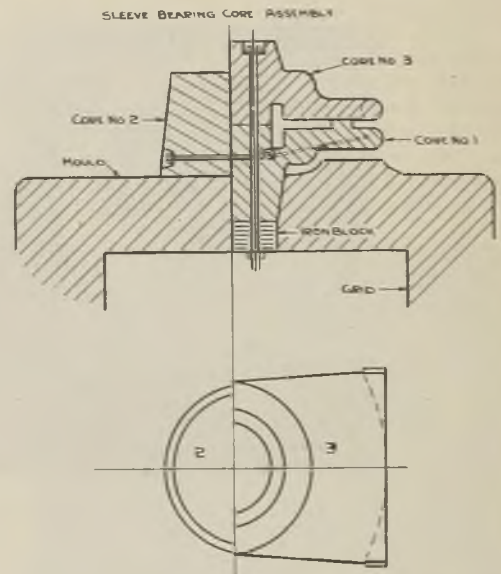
CORING METHOD USED FOR THE INSIDE OF THE BEARING.
